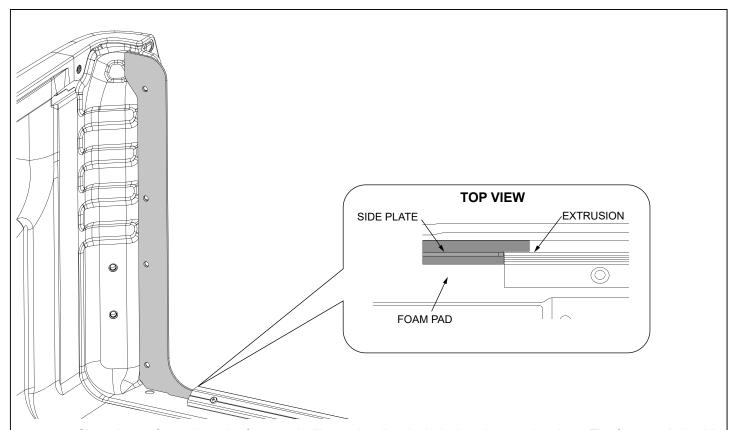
Secure the extrusion to the tub using 5 rivets.
